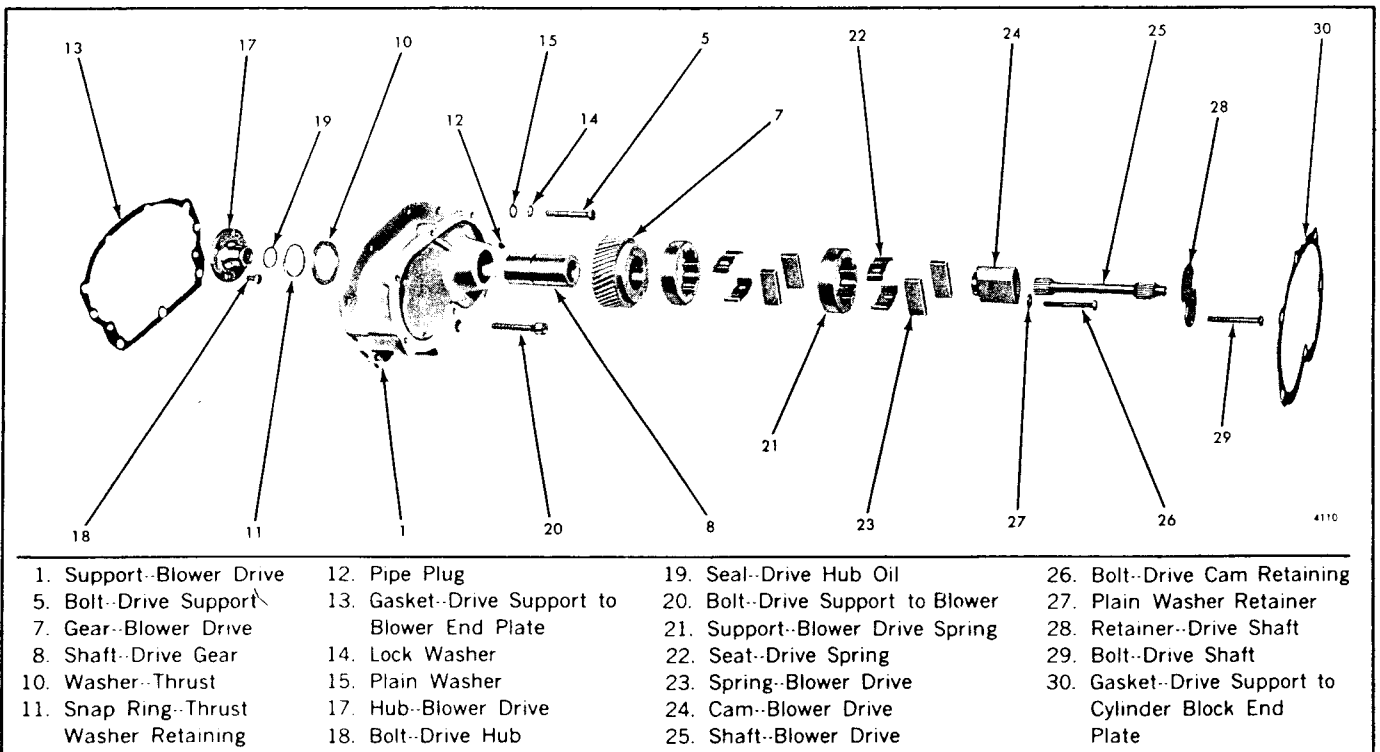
Blower Drive Support Details and Relative Location of Parts (8V-53 Engine)
